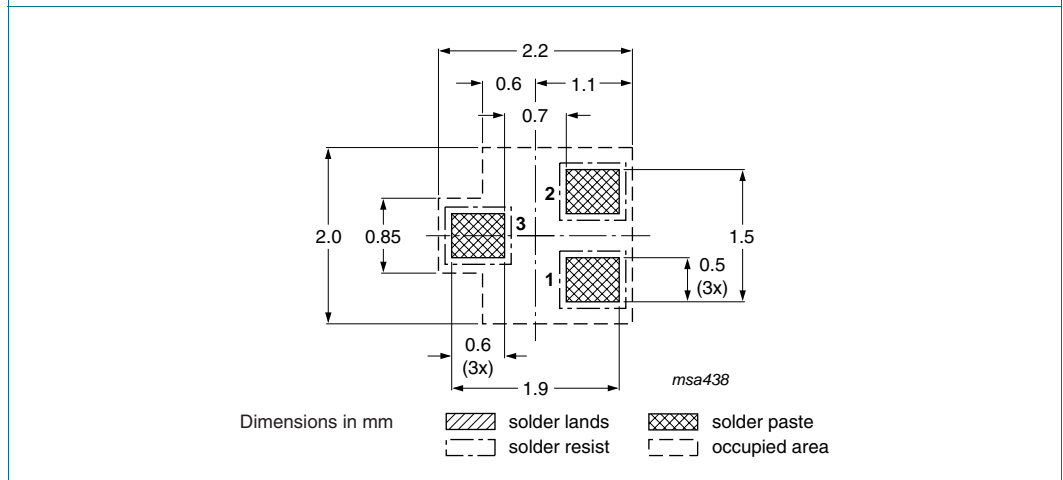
Reflow soldering footprint SOT416 (SC-75)
